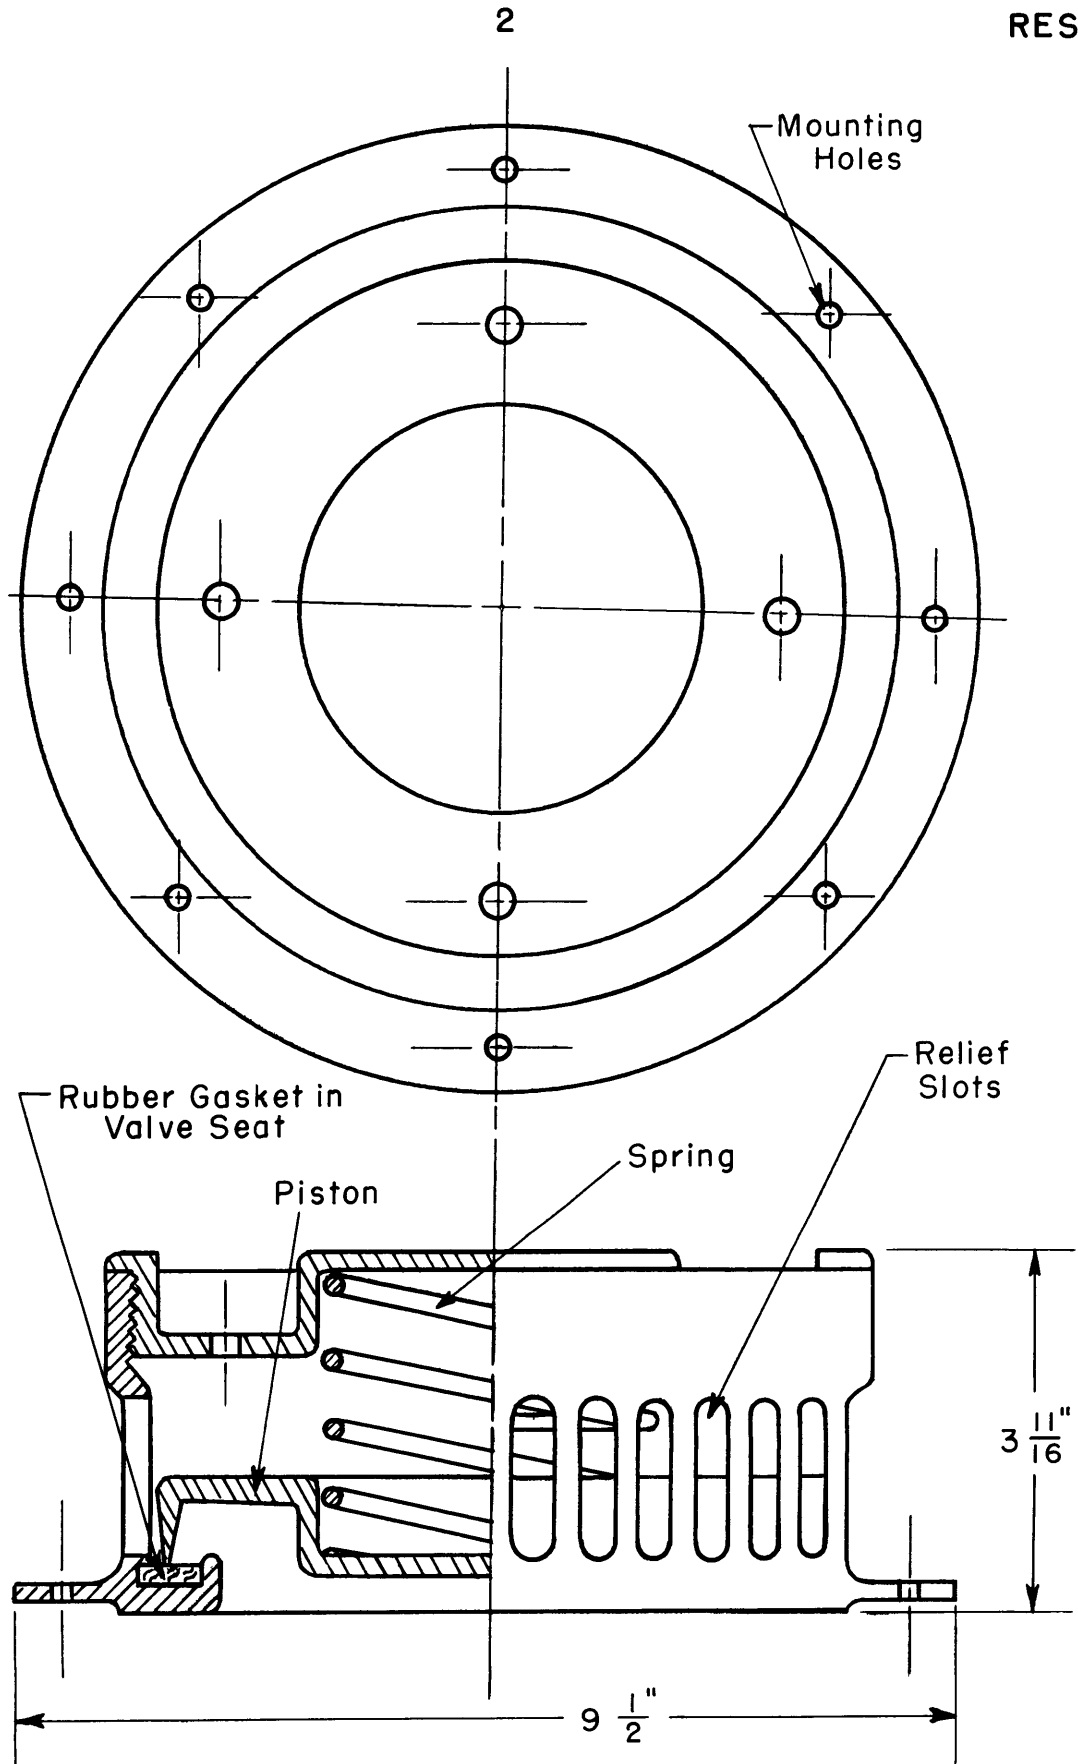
Figure I - Simplified Drawing of Concussion Valve Showing Overall Dimensions and Parts
